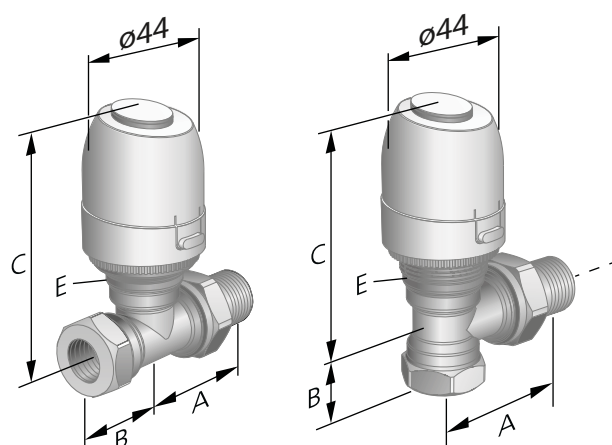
VALVE-S valve and VALVE-A respectively with ACTUATOR valve actuator mounted. E = M30 x 1.5 mm threaded mount
